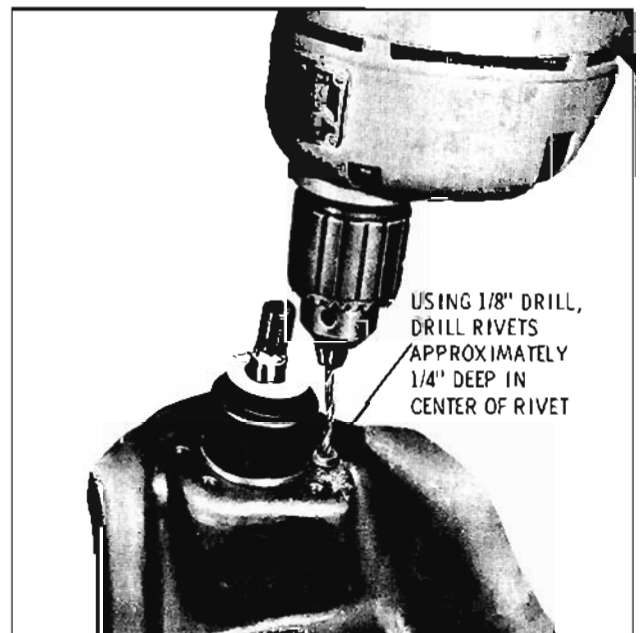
A Drilling Upper Ball Joint Attaching Rivets
